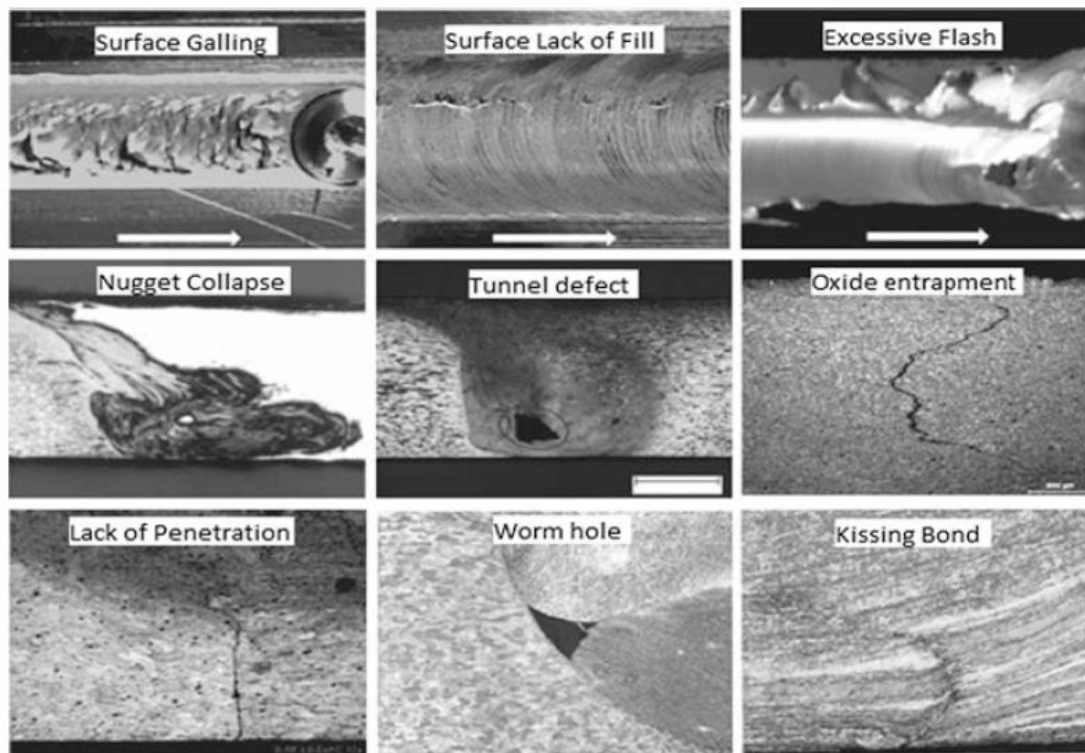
Types of defects in friction stir welded joints (Courtesy: Daniela Lohwasser and Zhan Chen 2010; Shettigar and Manjaiah 2017)
